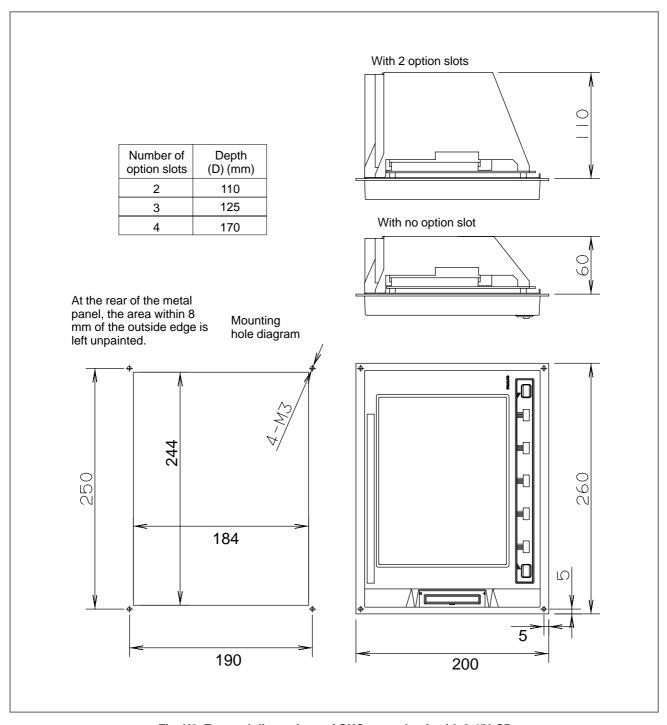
External dimensions of CNC control unit with 8.4" LCD
